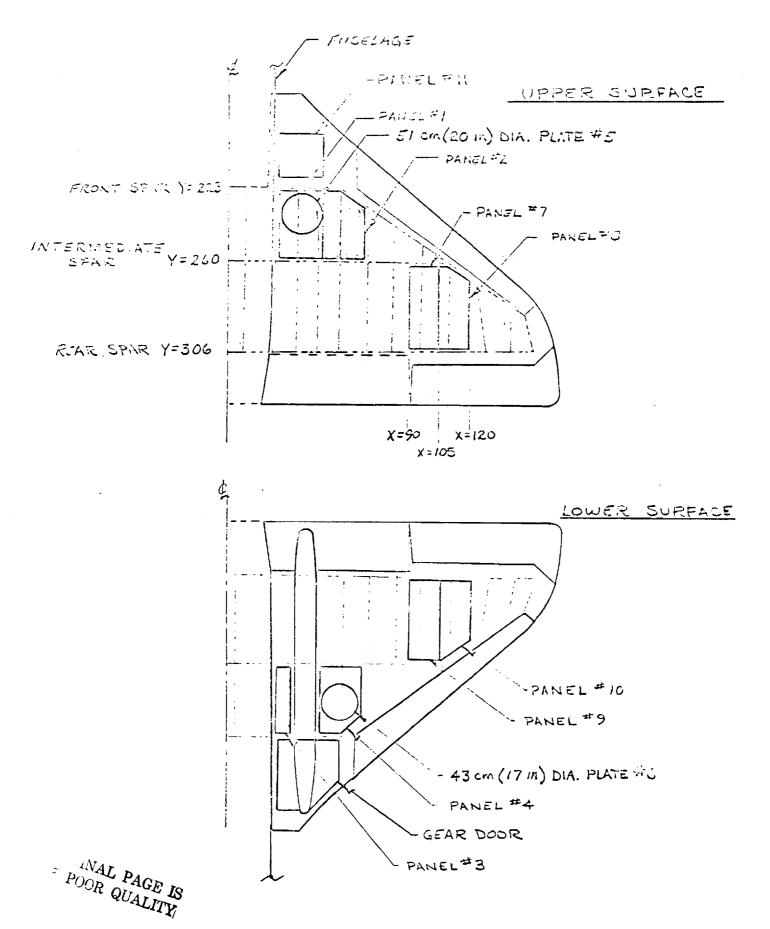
HOLE CONFIGURATION #6. PANELS 1&2 AND PLATE 5 REMOVED
